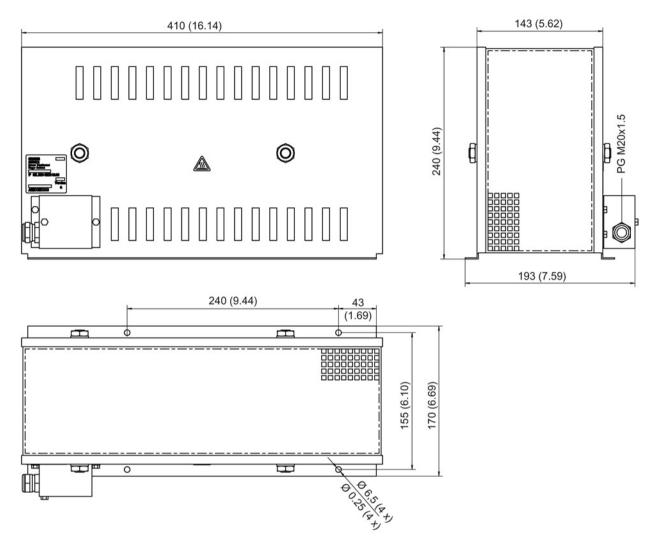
Dimension drawing of braking resistor 6SL3100-1BE31-0AA0 where  $P_n/P_{max}$  = 1.5 kW/100 kW, all dimensions in mm and (inches)
